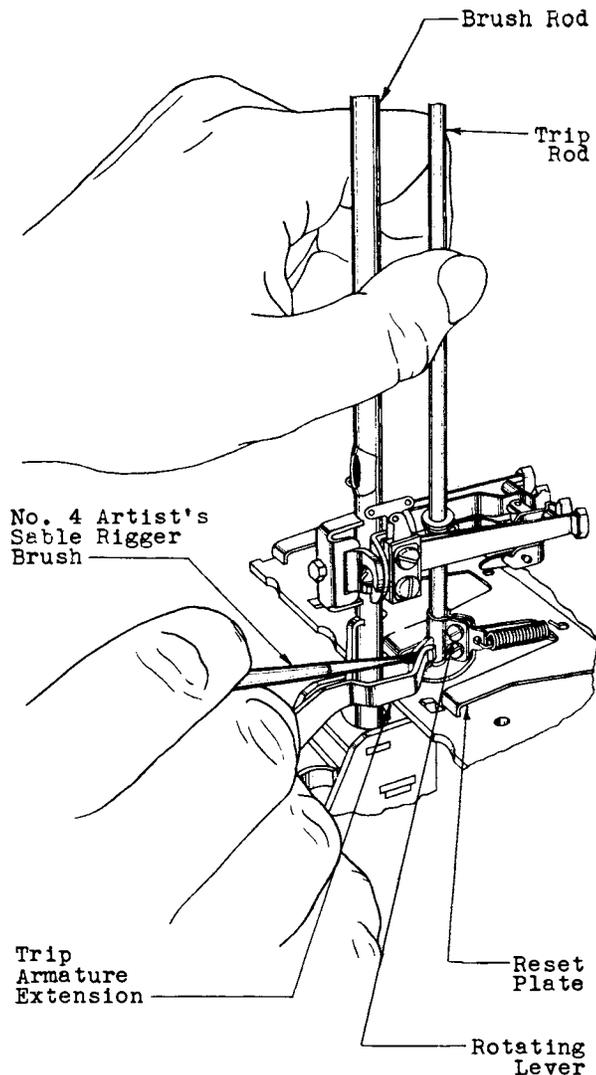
Method of Lubricating Trip Rod Rotating Levers and Trip Armature Extensions
